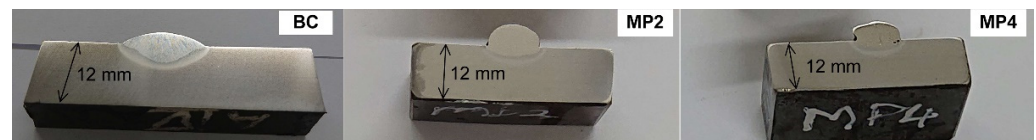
Photograph images of weld metal cross sections of BC, MP2, and MP4 weld metal.
